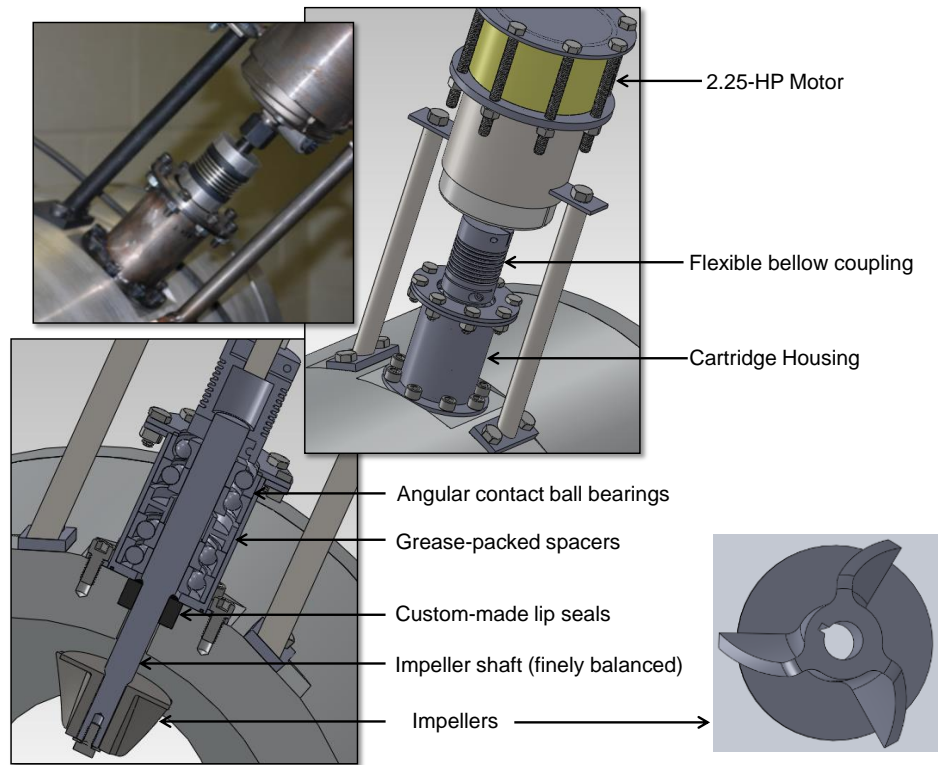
Detailed views of the impeller assembly. Various components namely, coupling, cartridge housing, bearings, spacers and seals are shown.
